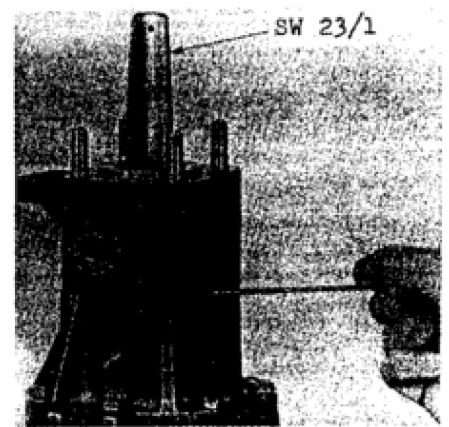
Using protector sleeve (SW 23/1), install and bottom valve housing without shims; then measure shim pack thickness as shown. Install shims equal to measured clearance minus 0.003.
